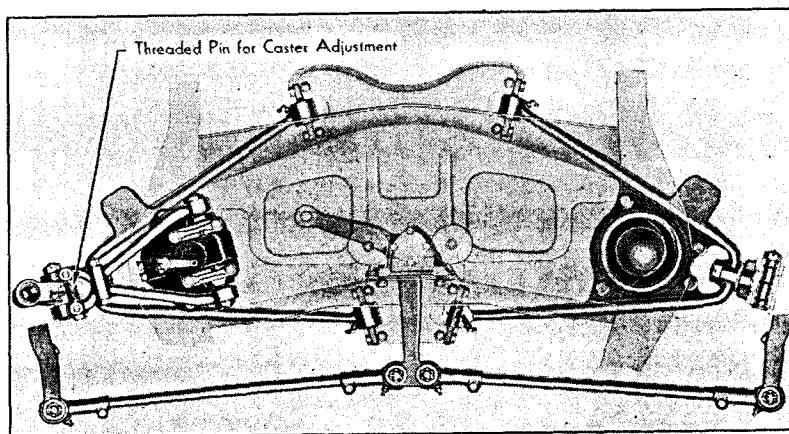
Front wheel suspension system viewed from above, showing the shock absorber arms at the left and the lower suspension arm at the right.
